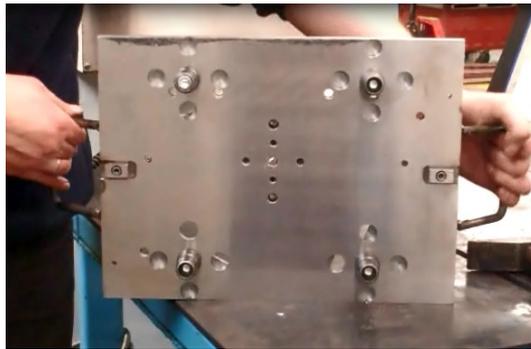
Bottom view of the support plate, corresponding to MTS Pallet in Fig. 2
